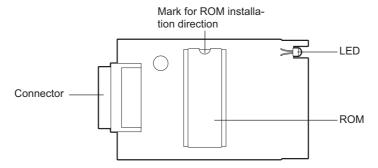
[Jig board: K-PWA-DLM-320]
